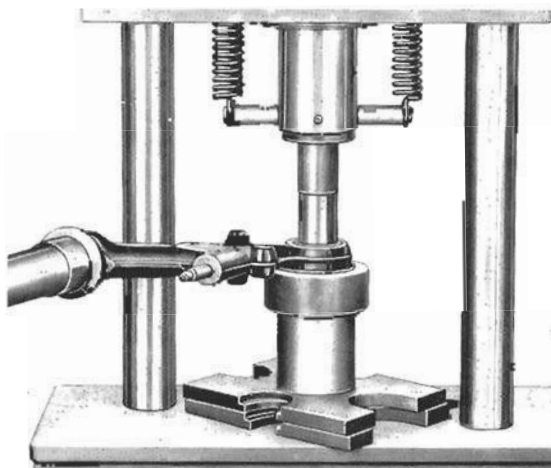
Hydraulic repair press being used to press the ball joint out of the torsion arm.
